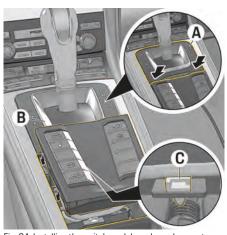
Installing the switch module and gear lever gate  $\,$
